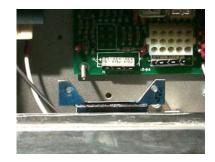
Attach the speaker bracket as shown before reattaching the plate to the cabinet.
